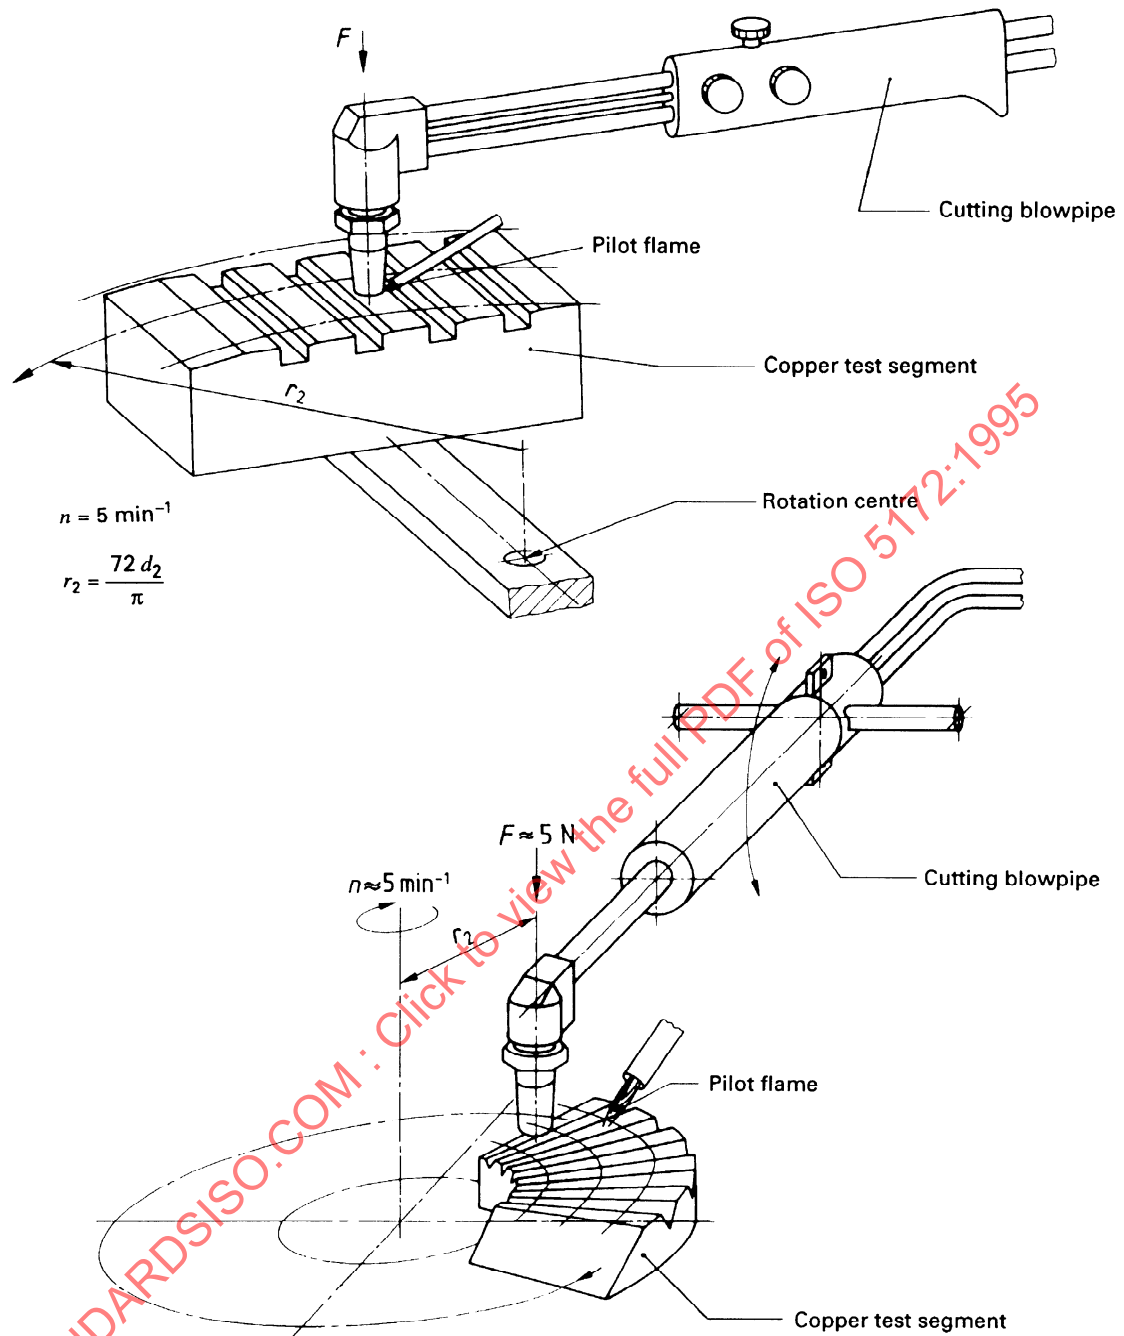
Assembly for testing cutting blowpipes for resistance to sustained backfire
